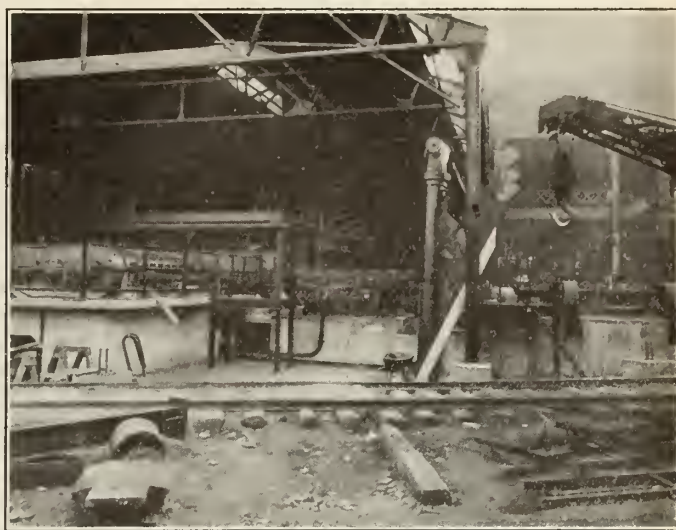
Charging end of Bloom Re-heating Furnace for Rail Mill.
